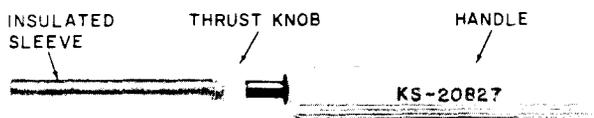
KS-20827 Wire-Unwrapping Tool (for Removing Solderless-Wrapped Connections)
